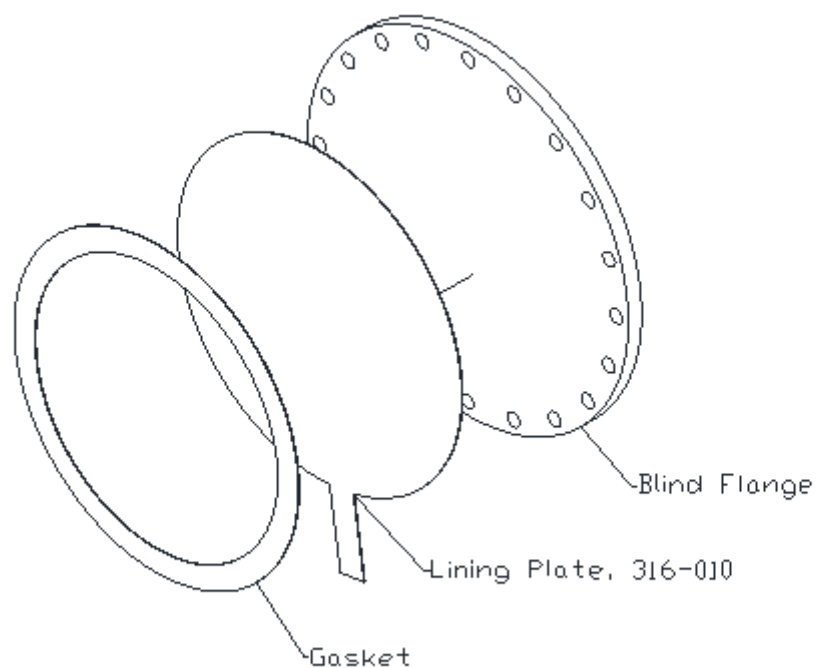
Assembly principle of Lining Plate with Blind Flange and Gasket.
